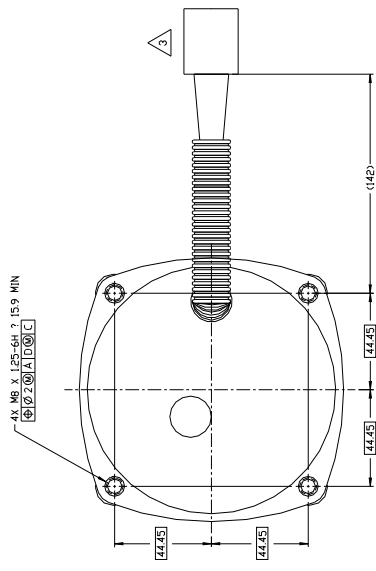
Flo-Tech Outline Drawing (Standard Flange Mounting)
